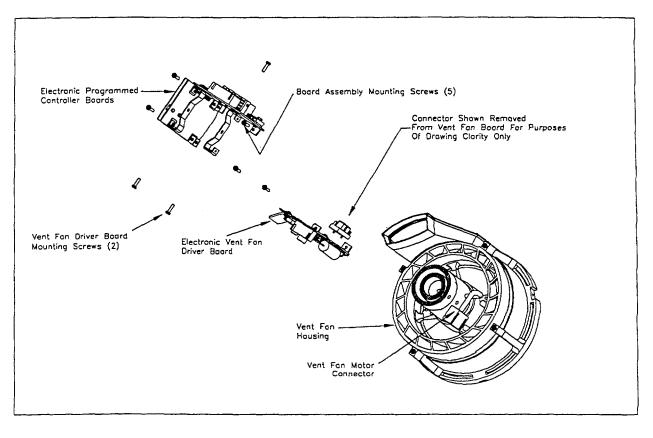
Detail, Removal of Printed Circuit Boards
